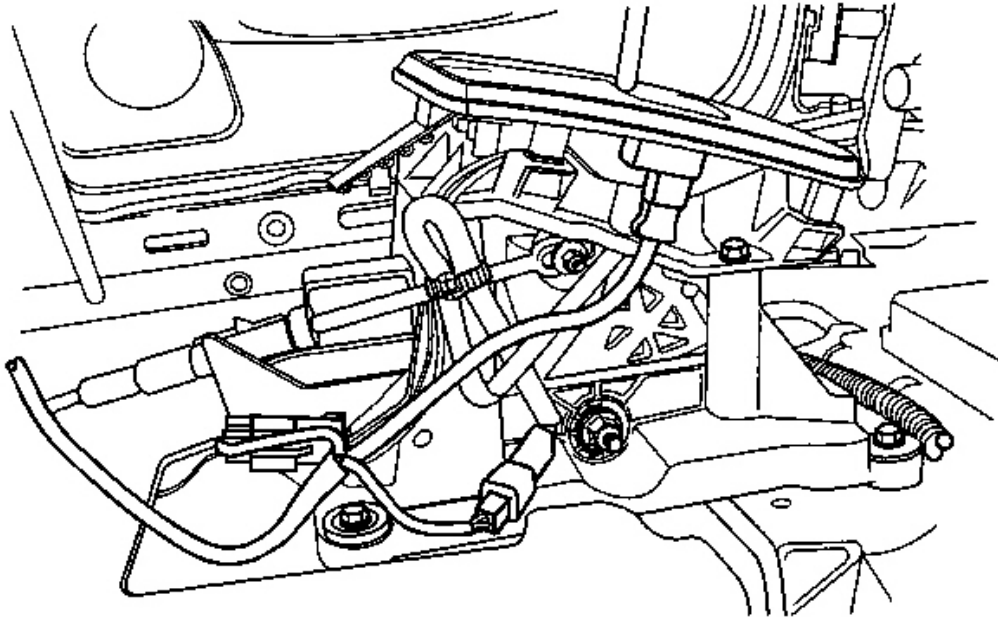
Wiring Harness Connectors & Shift Control Lever
